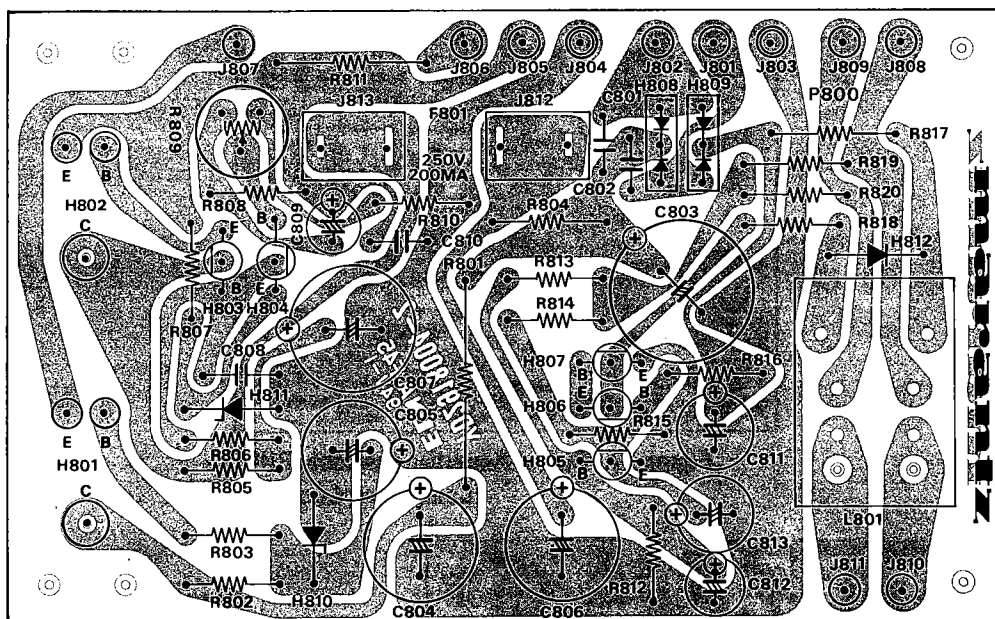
Power Supply and Protection Relay Circuit Assembly P800 Component Locations
